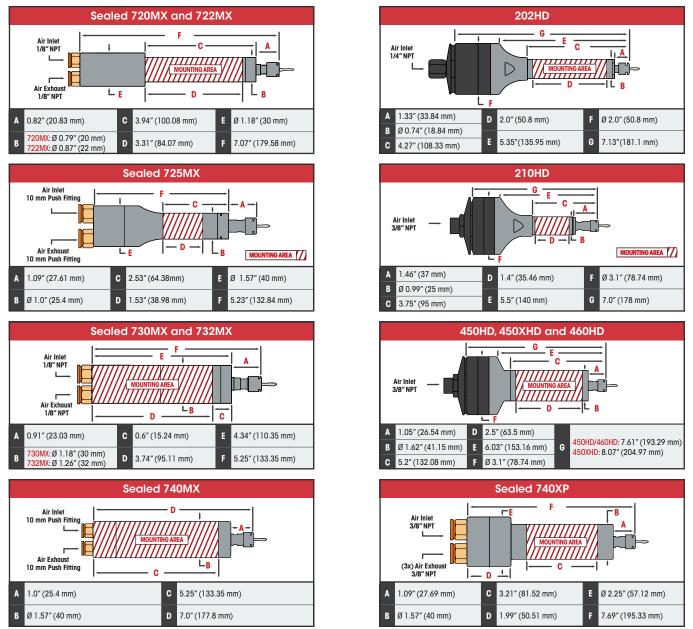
Tables that show the proper mounting area and dimensions for mounting Air Turbine Motors®.
